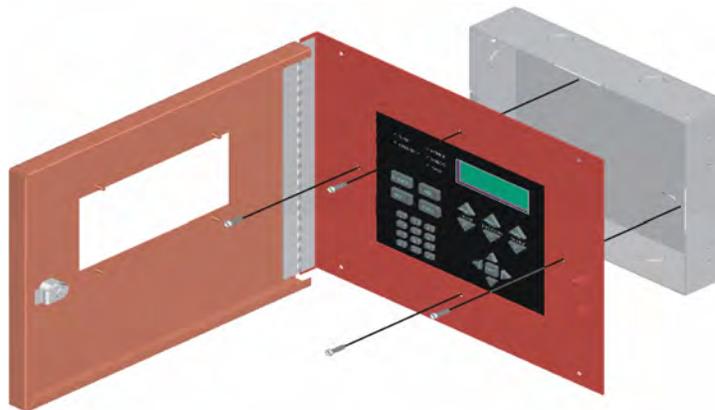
Attaching Annunciator/Door Assembly to Backbox
